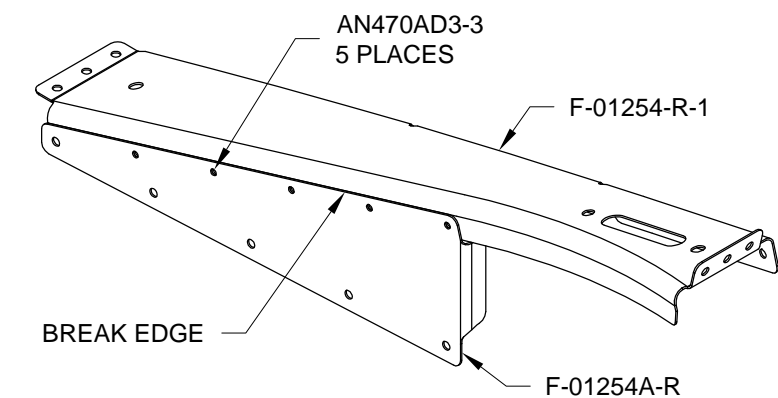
ROLL BAR SUPPORT ASSEMBLY
